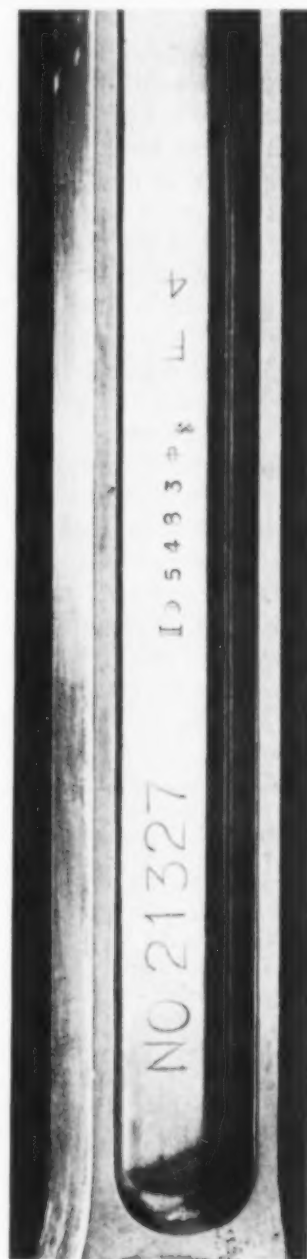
Welded-In Head in Exhaust Valve for German B.M.W. 801-D 2 Aircraft Engine. Sectioned on center; full size view
